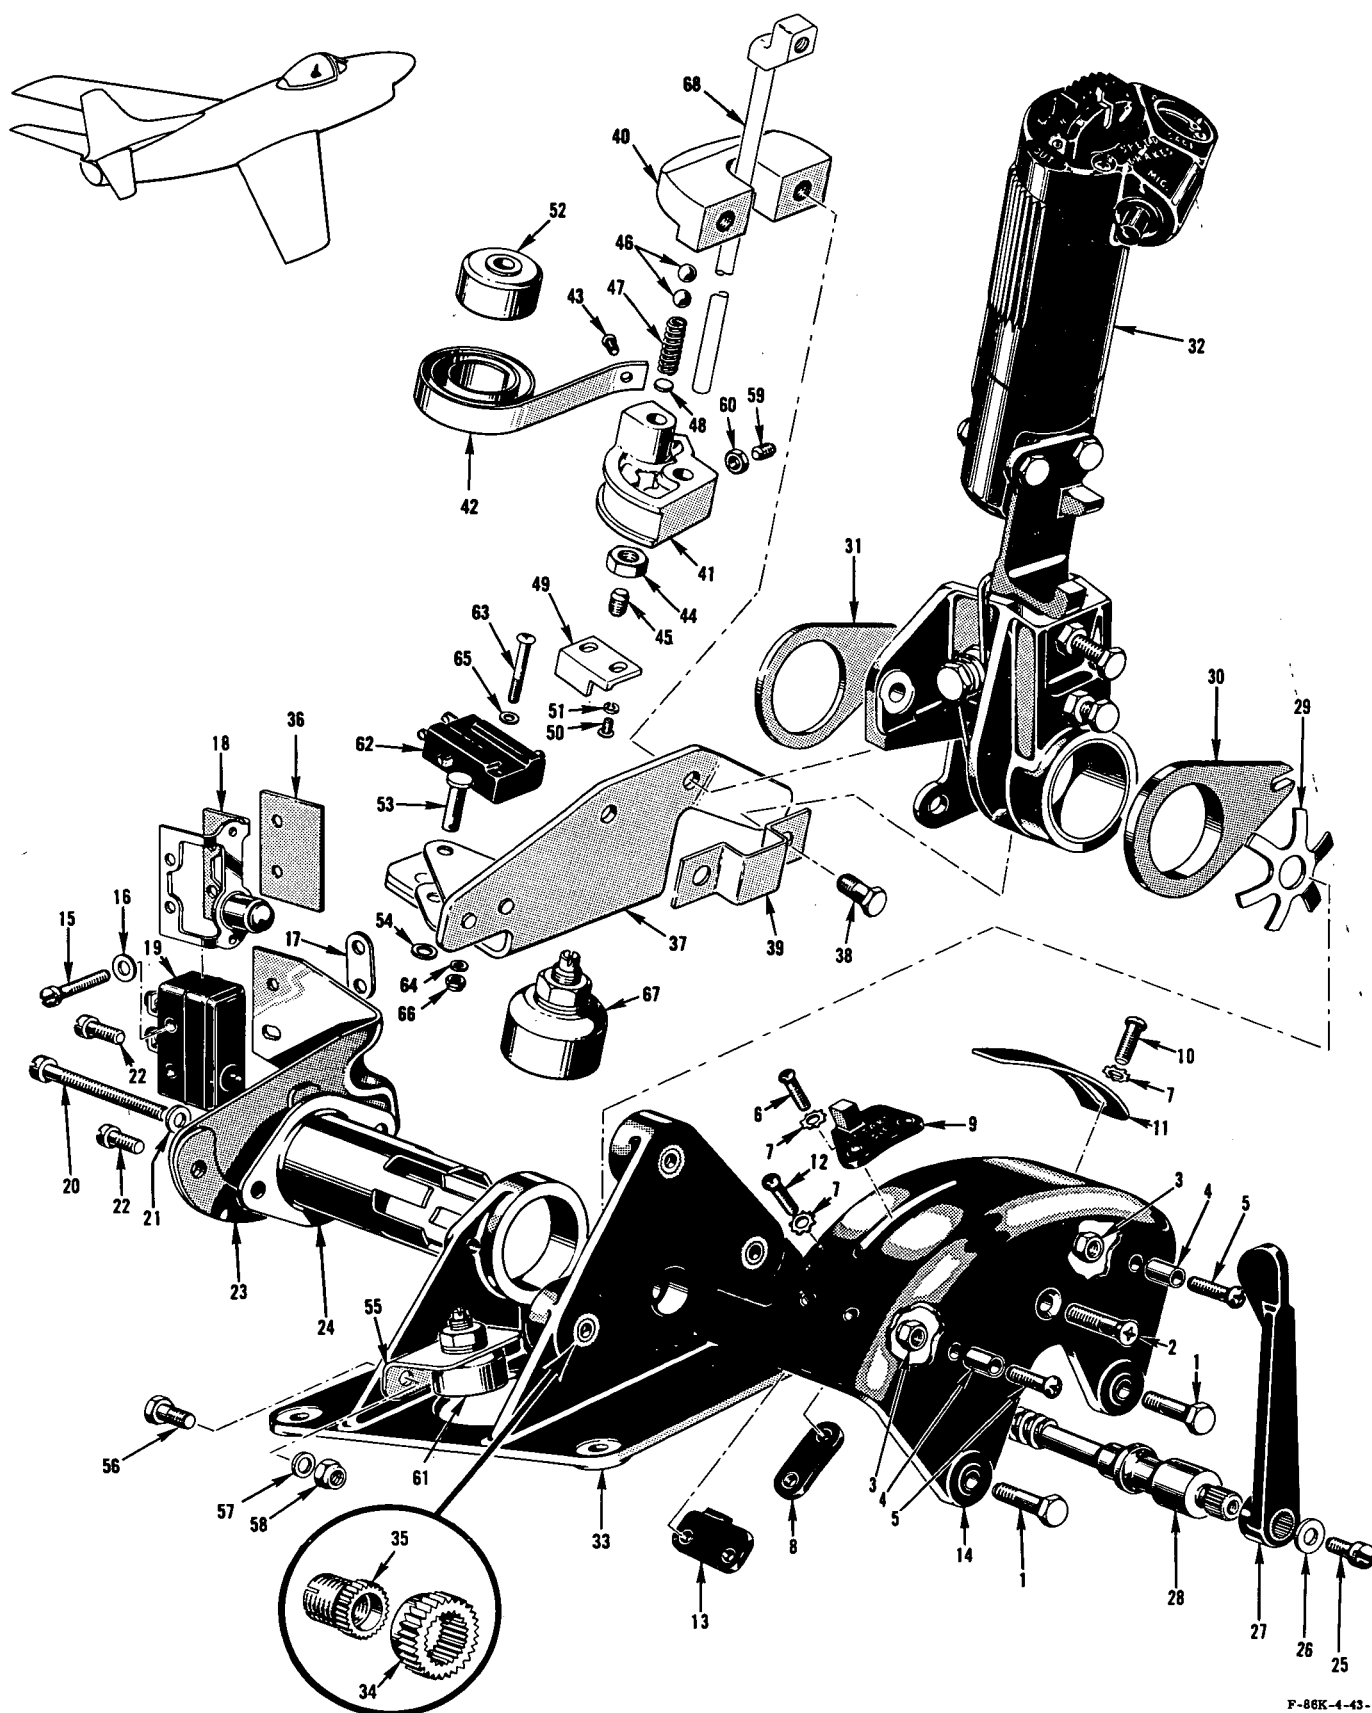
FUSELAGE ENGINE SECTION CONTROL EQUIPMENT
